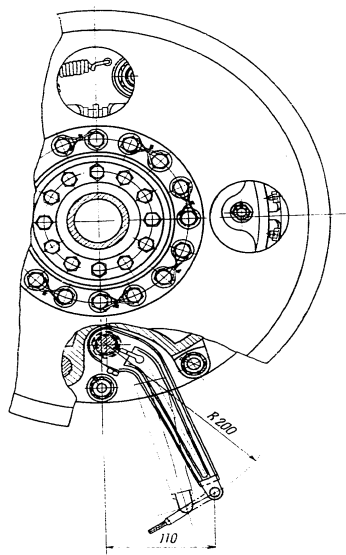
MAIN ROTOR BRAKE CONTROL SYSTEM
